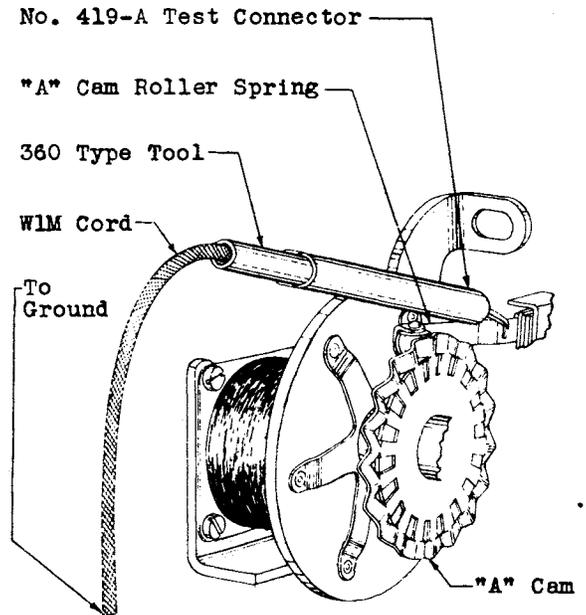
Method of Rotating Sequence Switches Electrically by Means of the No. 419-A Test Connector and the WLM Cord Equipped with No. 360 Type Tool
